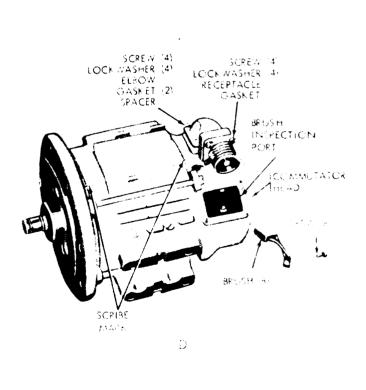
Power pack pump dc motor disassembly or assembly (1 of 2).
